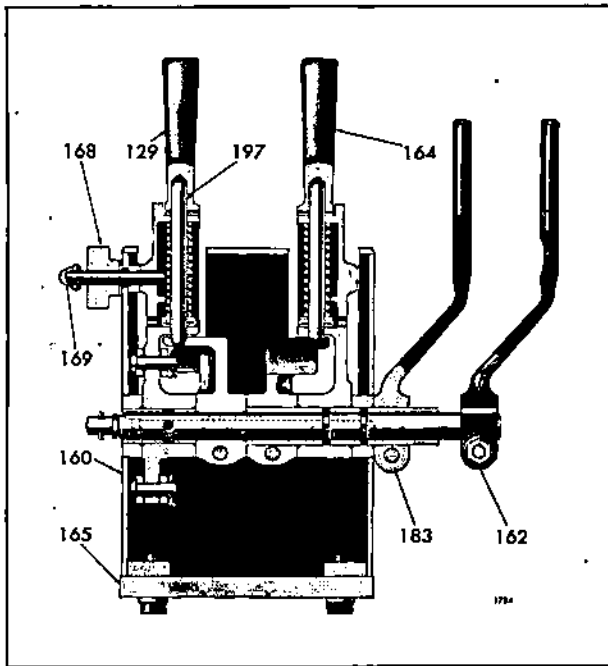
Master Throttle Assembly on a Tandem Twin Unit
